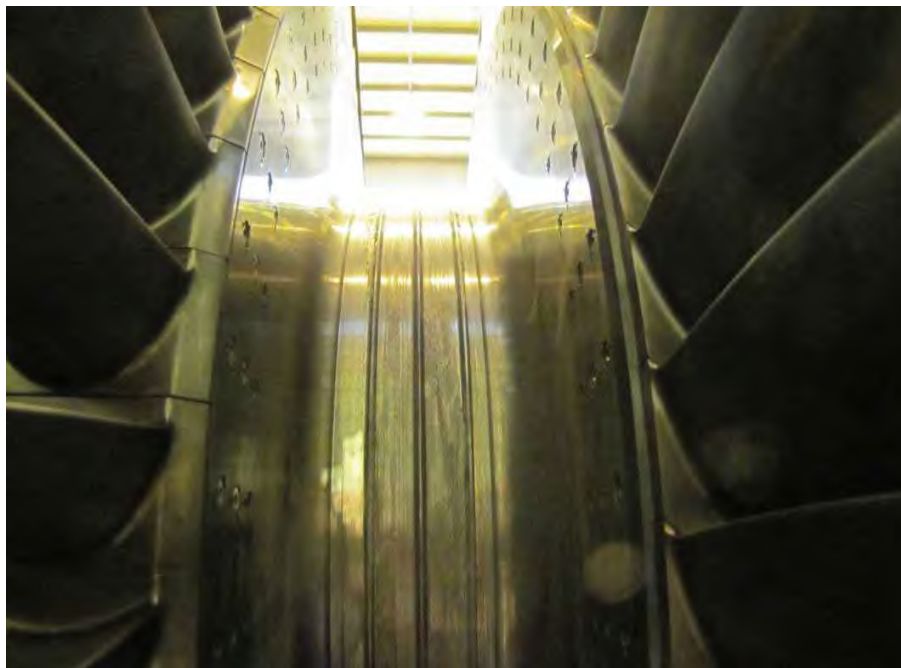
Close-up photograph of intermediate pressure turbine rotor showing light rub damage on interstage seal surfaces.
